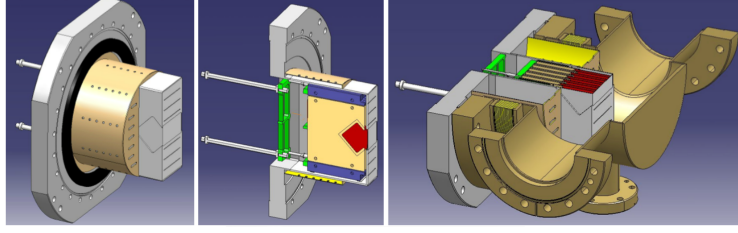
Schematic layout of the box-shaped horizontal RP with the cylindrical RF shield, with the tracking detector packages installed inside. The ferrite shielding is mounted on the moving detector housing.
